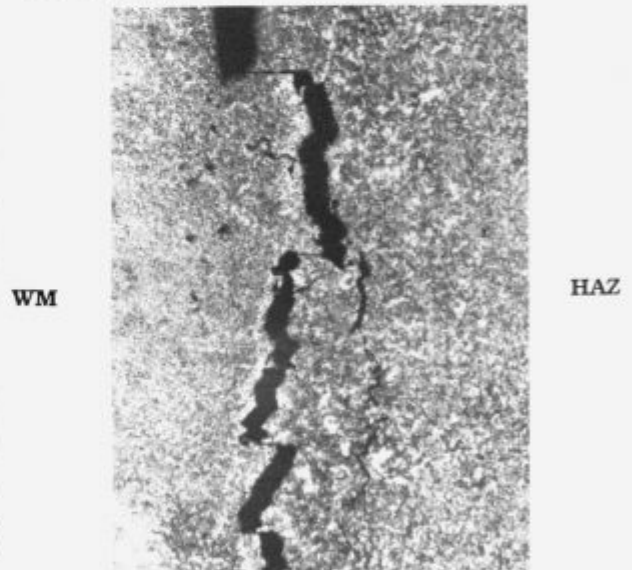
Fatigue crack tip in the overmatched weld metal but brittle fracture initiates and remains at CGHAZ during the CTOD test
